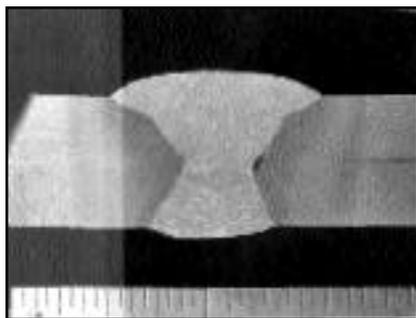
Incomplete fusion in the fill weld due to a slag pocket on one side of the root bead.
